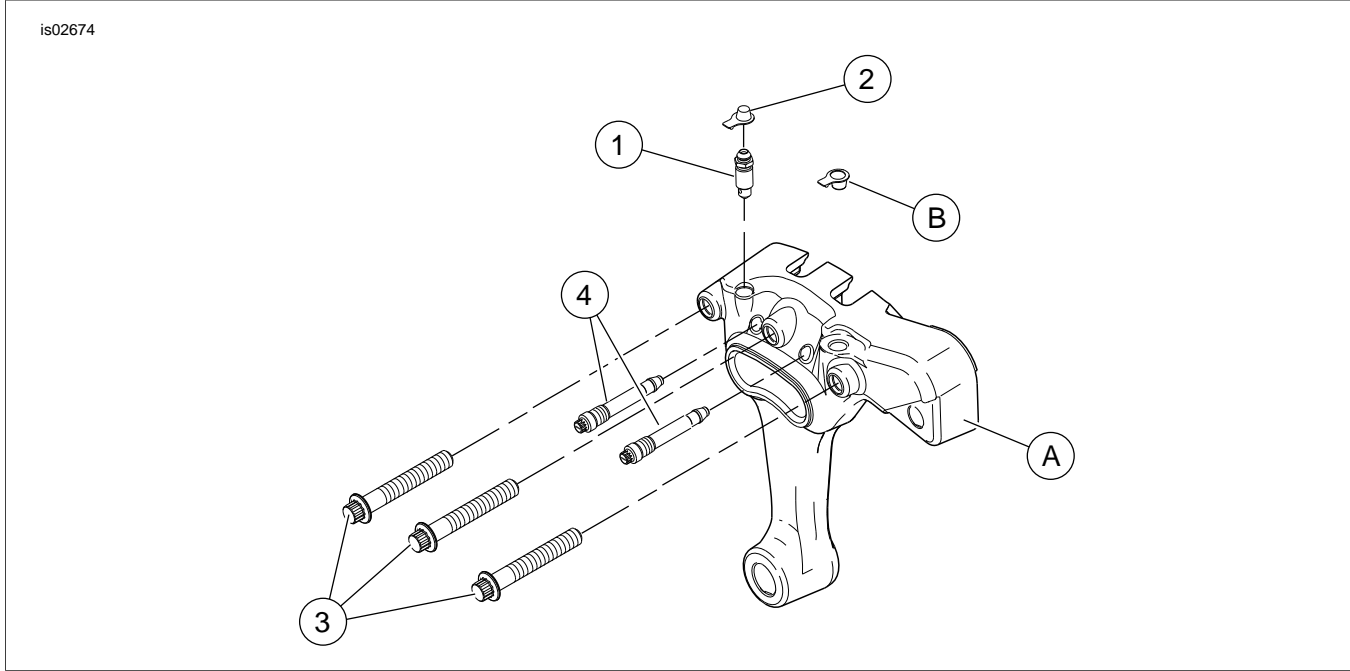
Service Parts: Chrome Brake Caliper Hardware Kit
